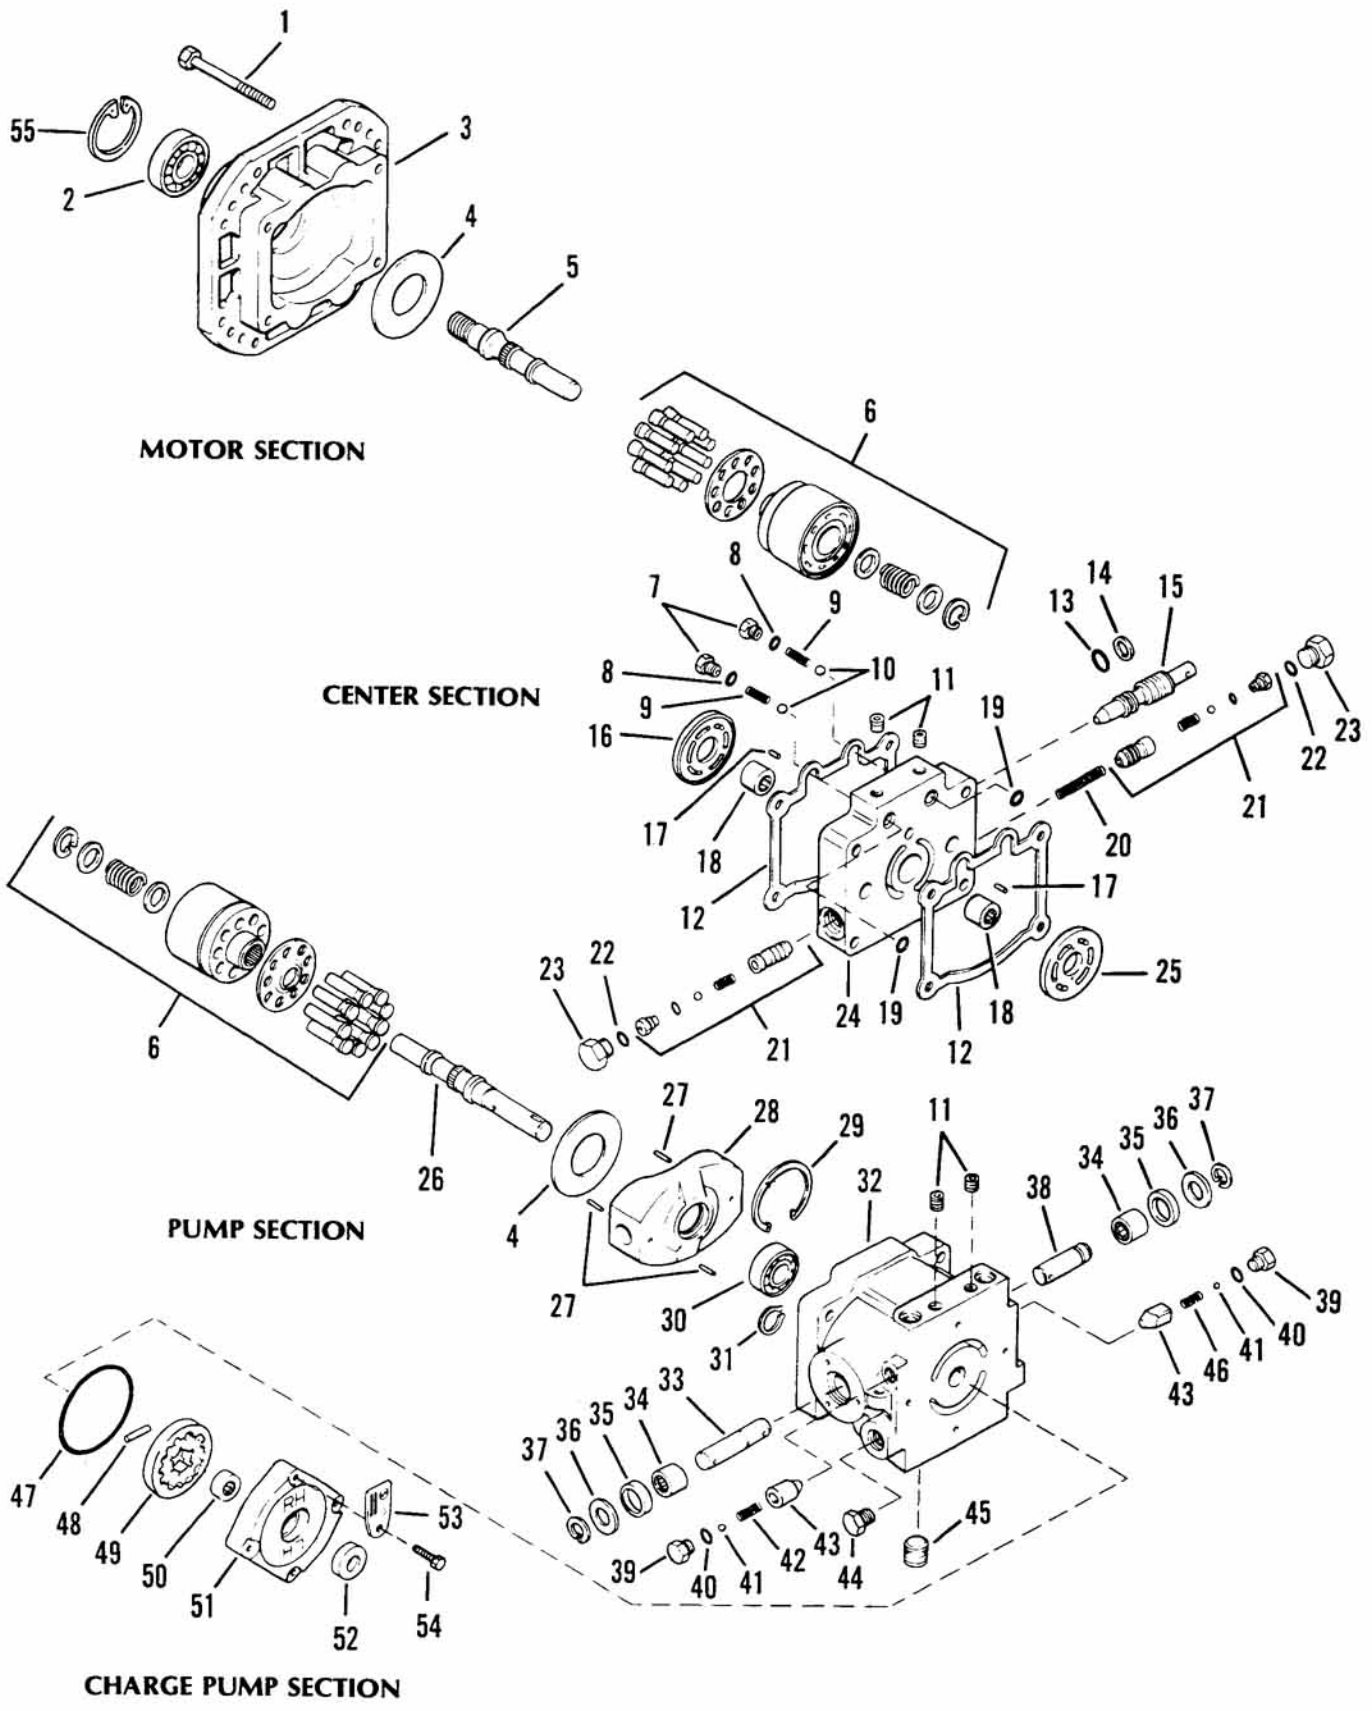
HYDROSTATIC EXPLODED VIEW
